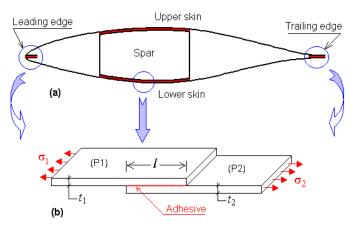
Blade airfoil cross-section: (a) bonded areas, (b) simplified plate model with a single-lap adhesive joint
